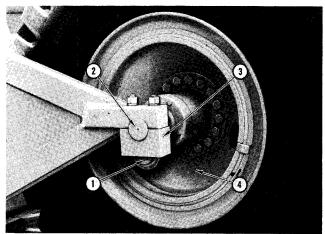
WHEEL AND AXLE (BM-2) 1. "U" Bolt 2. Axle 3. Axle Block 4. Wheel
